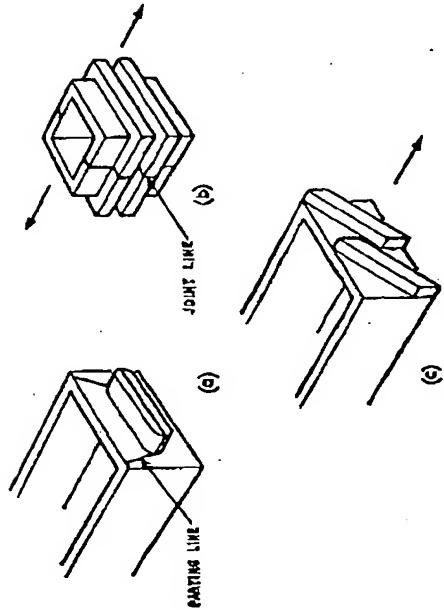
Moulding which incorporates projections: (a) moulded with stepped parting line; (b) moulded with split; (c) moulded with side cavity
